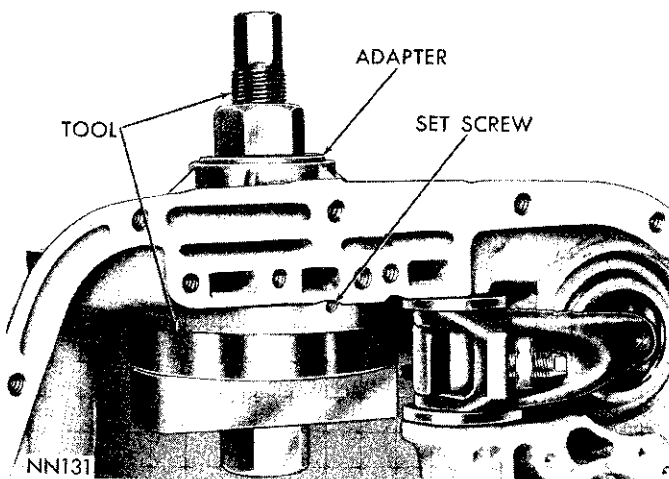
Installing Overrunning Clutch Cam (A-727)
